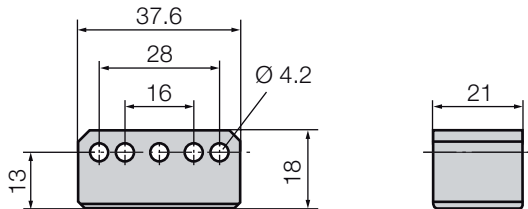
Installation dimensions for BTL6-A-3801-2
